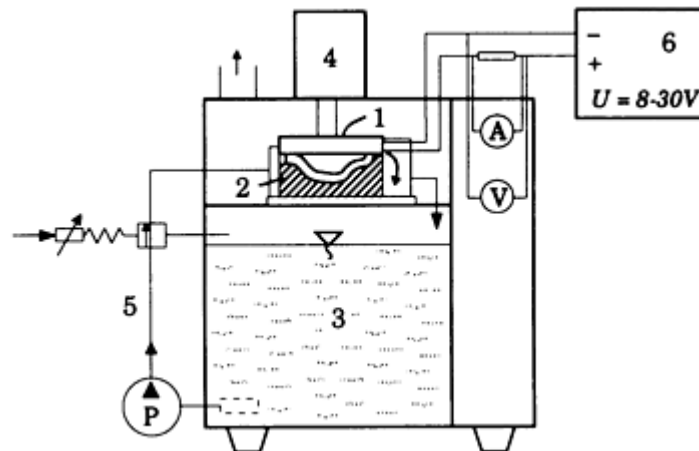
Electrochemical machining equipment schematic. 1, tool electrode; 2, finishing workpiece; 3, tank of electrolyte; 4, clamping system; 5, electrolyte supply system; 6, power supply
